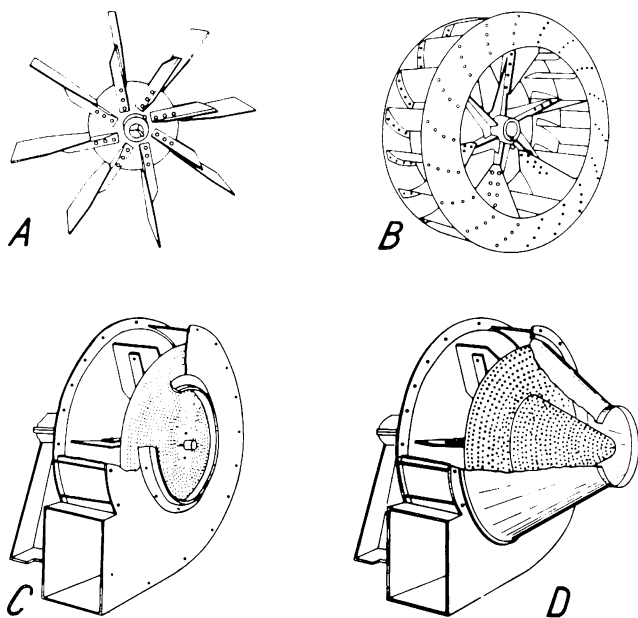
Representative types of cotton gin fan wheels: A, Plain 8-blade wheel; B, shrouded 18-blade wheel; C, Rembert-type wheel in casing; D, Rembert-type cone developed by the USDA Cotton Ginning Laboratories (public patent).
